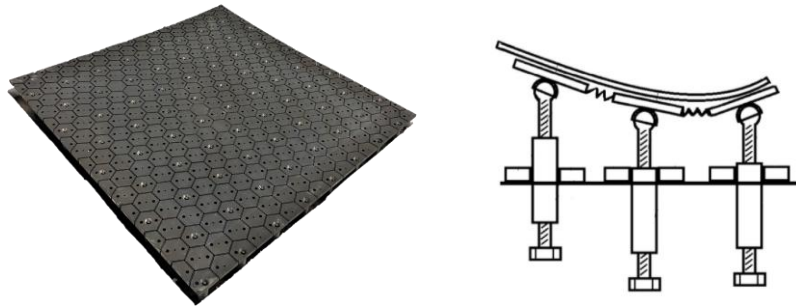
50 cm \times 50 cm adjustable mold prototype with hexagon-patterned flexure connected via bolt actuators to a steel backup structure (left); adjustable mold concept drawing showing side view of actuator-driven shape deformation and panel conformation on top (right).
